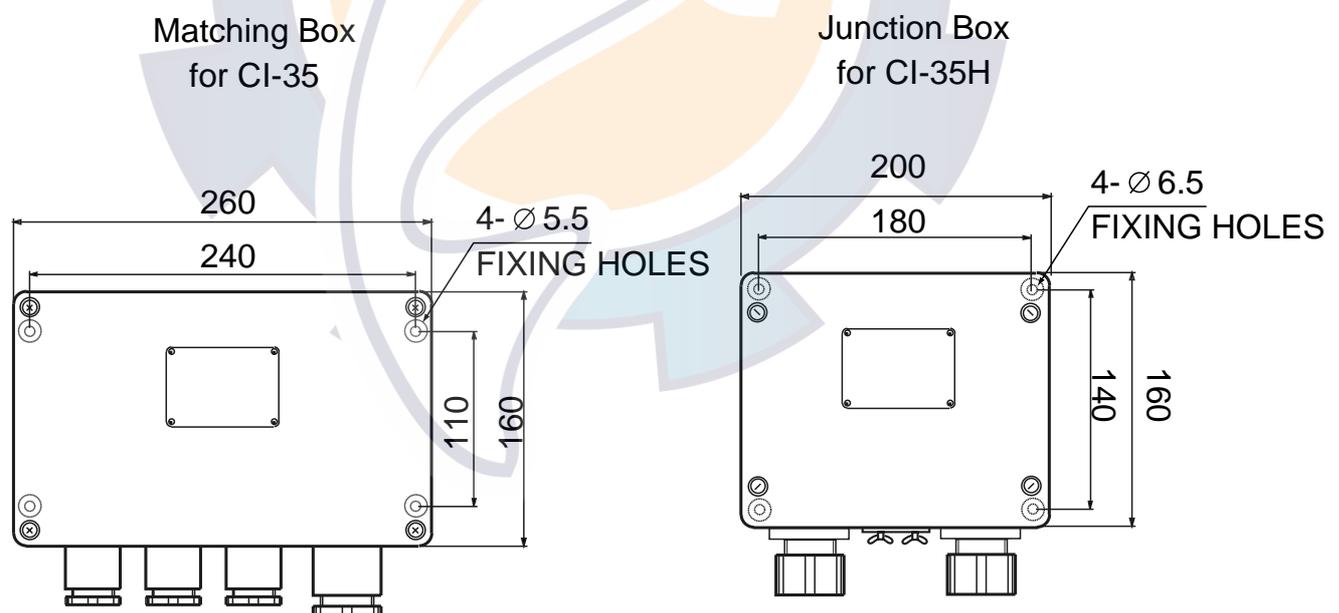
Matching Box/Junction Box Mounting Dimensions
